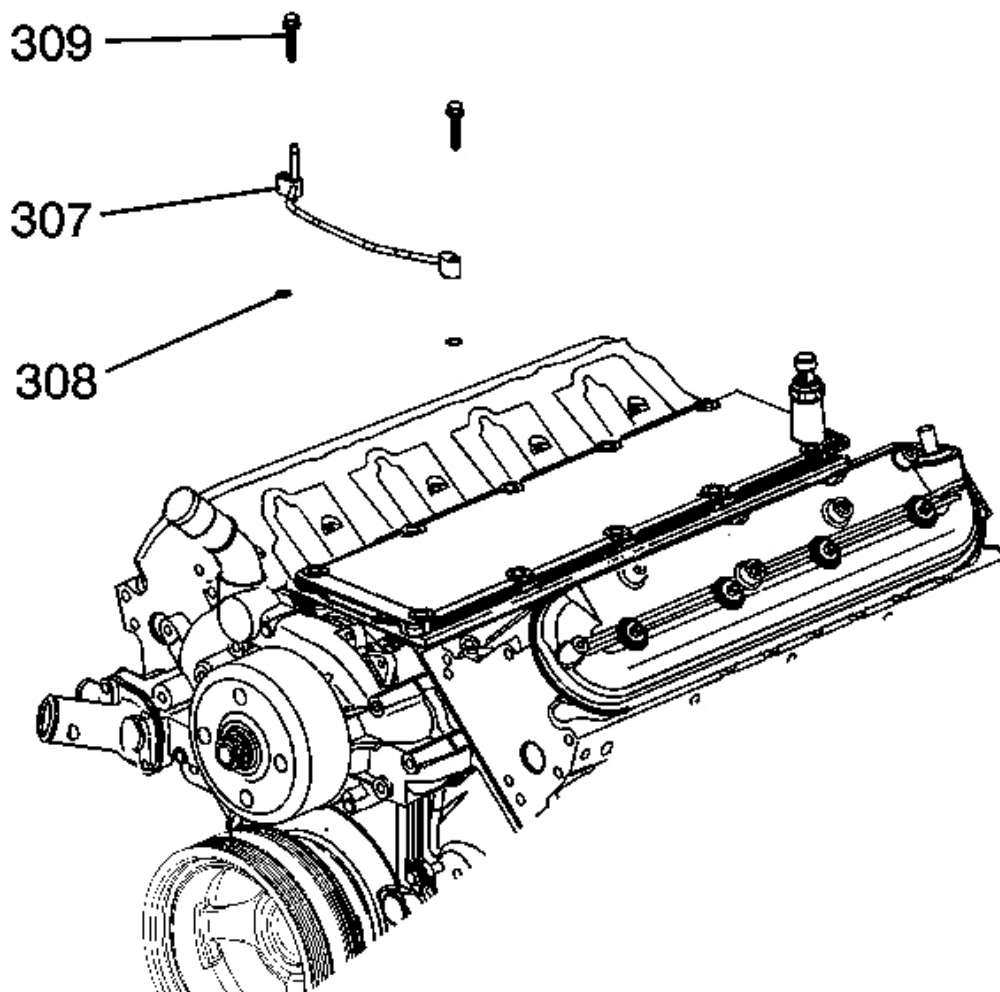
Identifying Engine Coolant Air Bleed Pipe
